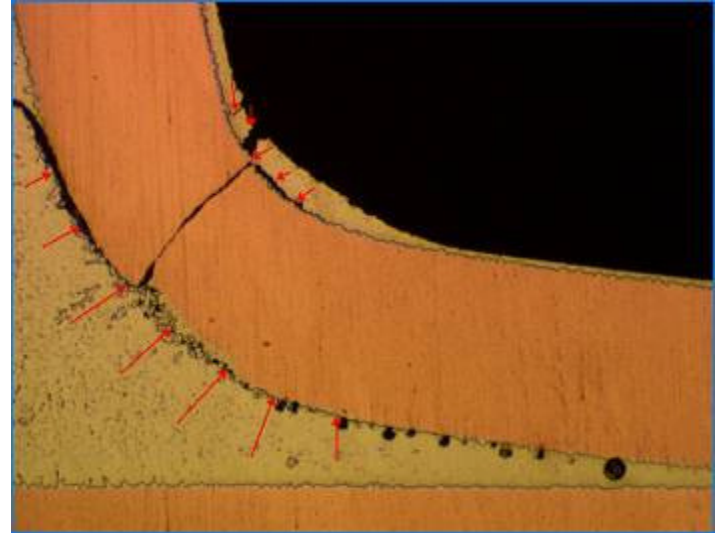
cross section, SN63, U20, right lead and solder crack and voids, 200xa
